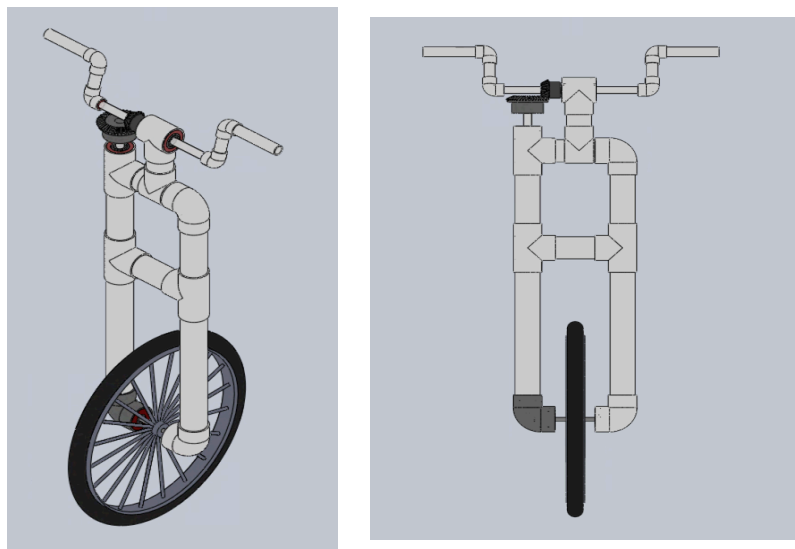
Isometric and Front View of Final Hand Cycle CAD Design
